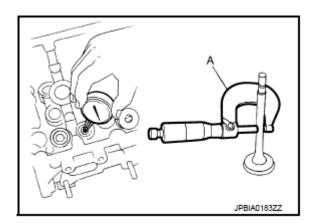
Measuring Valve Guide Clearance Using Tool Courtesy of NISSAN NORTH AMERICA, INC.
